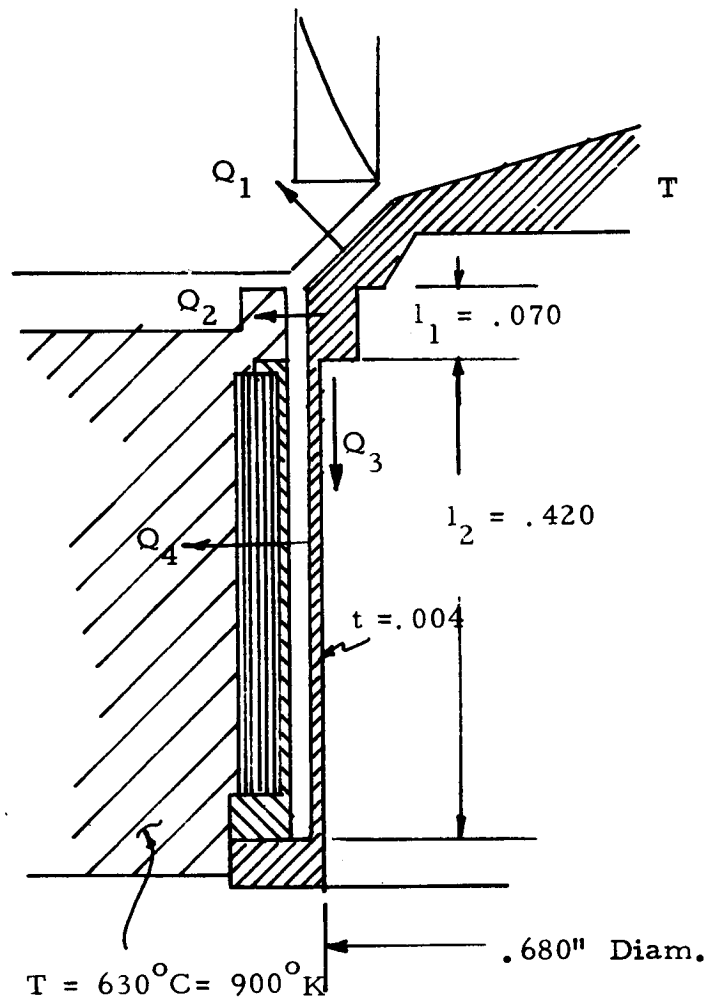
Cross Section of Back Cavity Piece and Shielding
